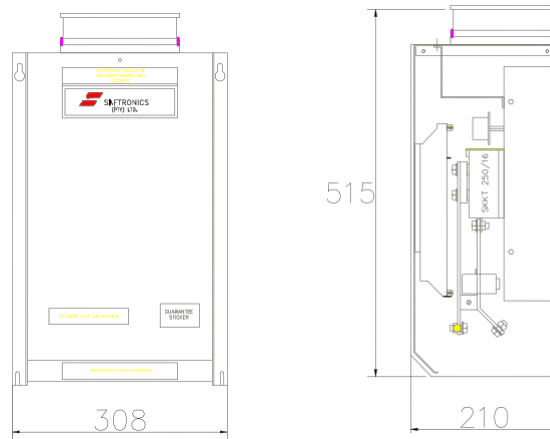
SH6 SERIES - SIZE B OVERALL DIMENSIONS
